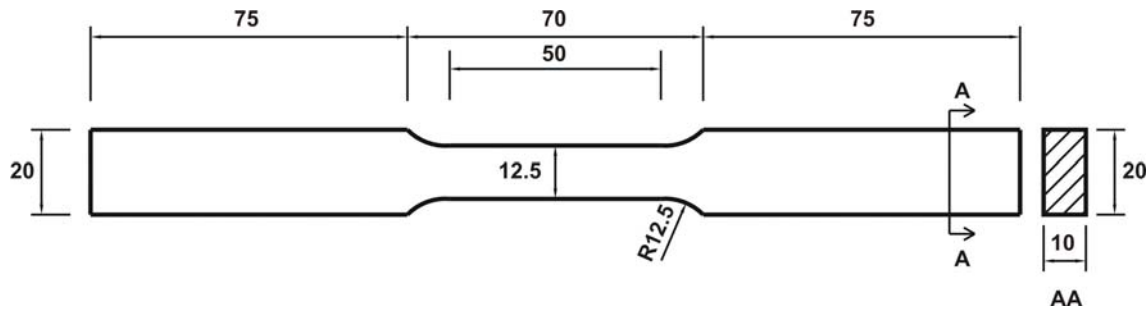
Geometry and dimensions (in mm) of test coupons for uniaxial tension tests.
